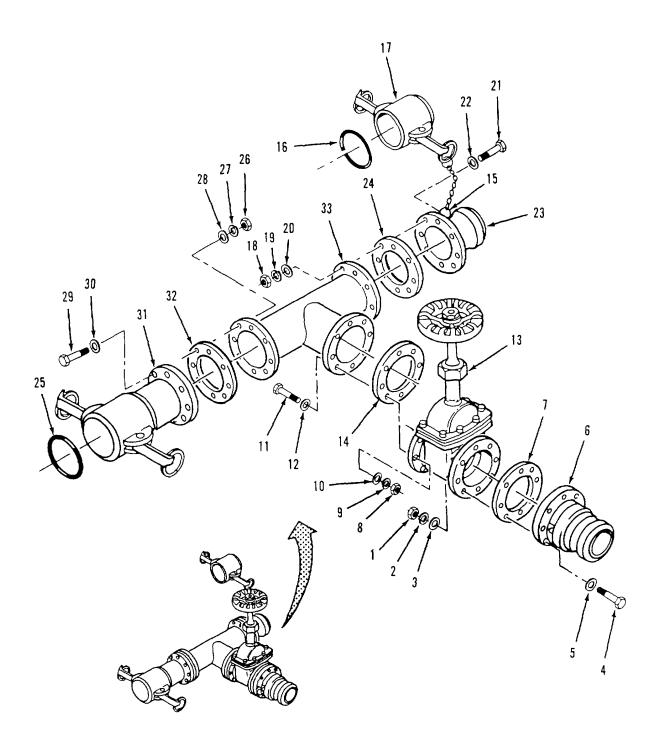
Tee and Gate Valve Assembly (9114-Y2) Disassembly.
